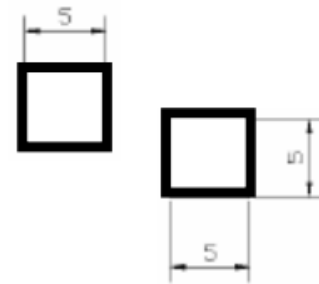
3 Charpy Impact Test Specimen Dimensions
